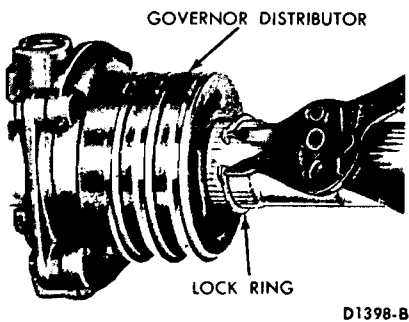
Removing or Installing Governor Distributor Lock Ring
